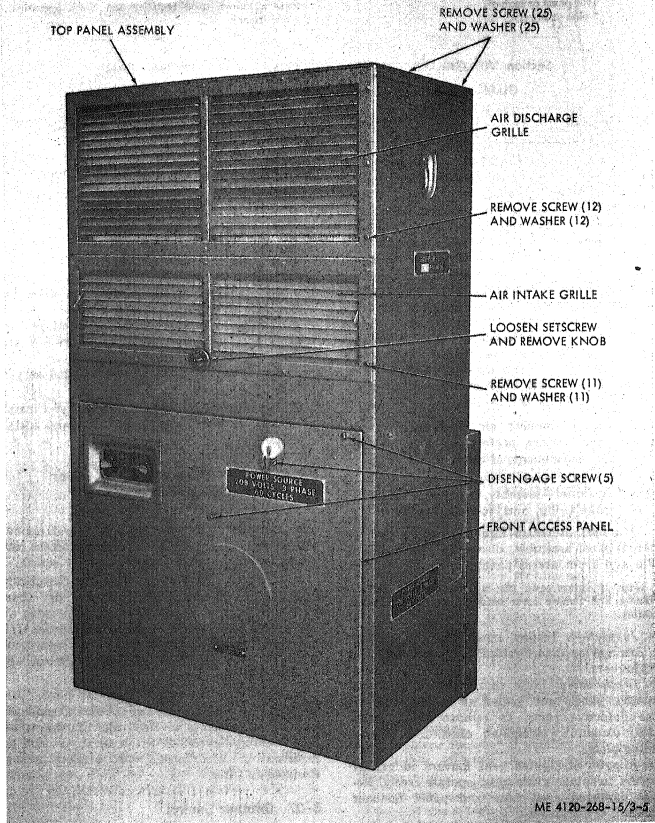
Top panel assembly, air intake grille, air discharge grille and front access panel, removal and installation.
